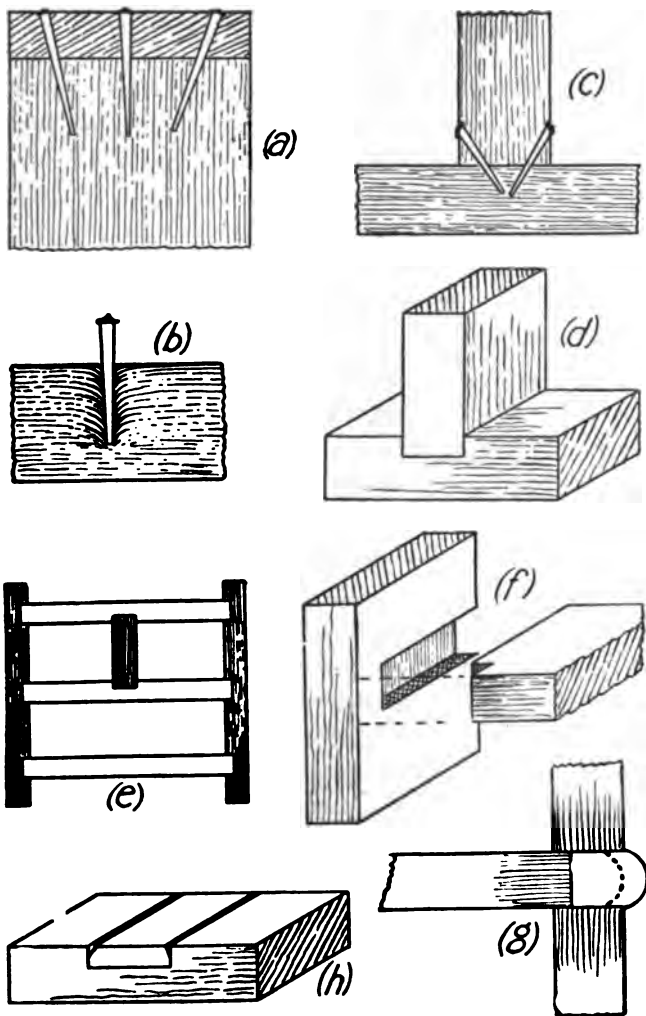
(a) Dovetail nailing ; (b) nail forcing wood fibres apart ; (c) skew nailing ; (d, e) housing ; (f) "stopped" housing ; (g) moulding in front of housing ; (h) starting a groove.
